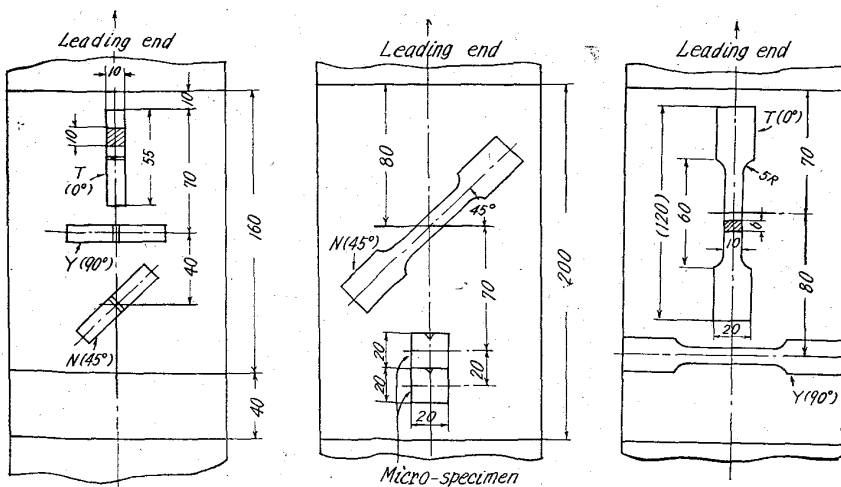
Sketch showing method of taking tensile test specimens and Charpy impact test specimens 0°, 45°, 90° degrees to extruding direction.
